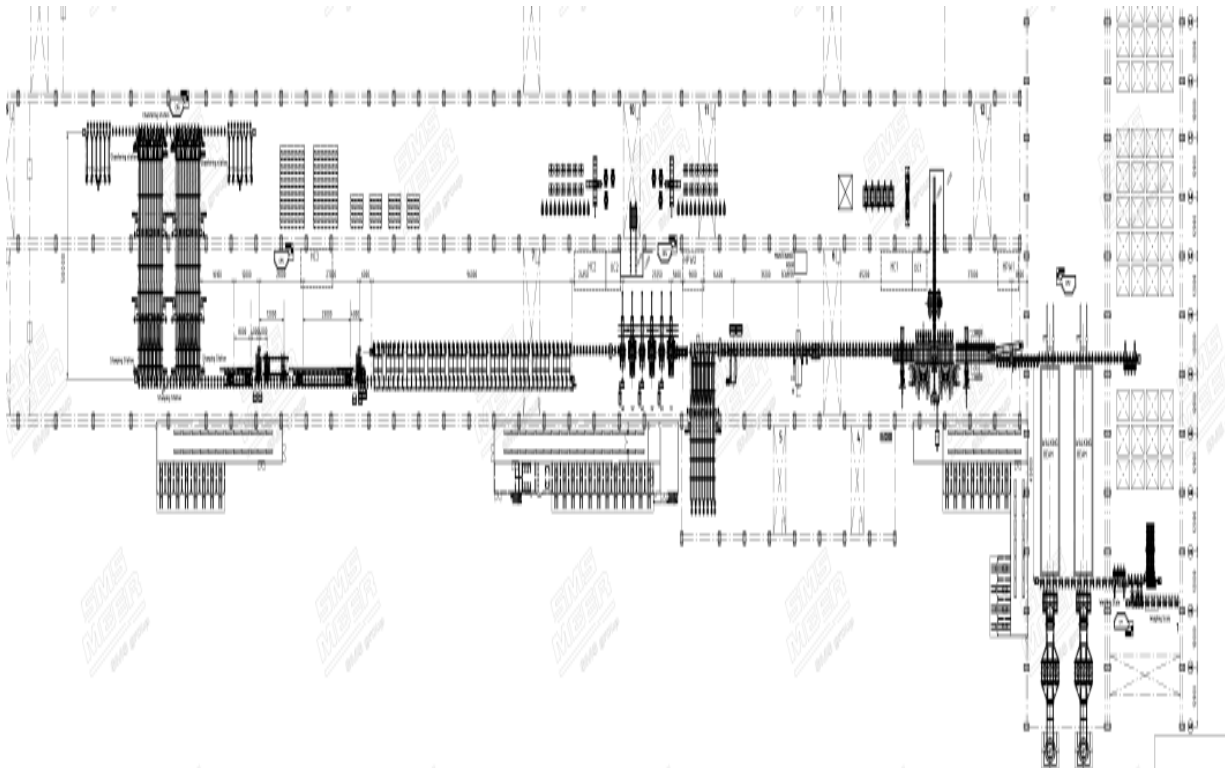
Typical Large bar mill layout for 1.000.000 tpy.
